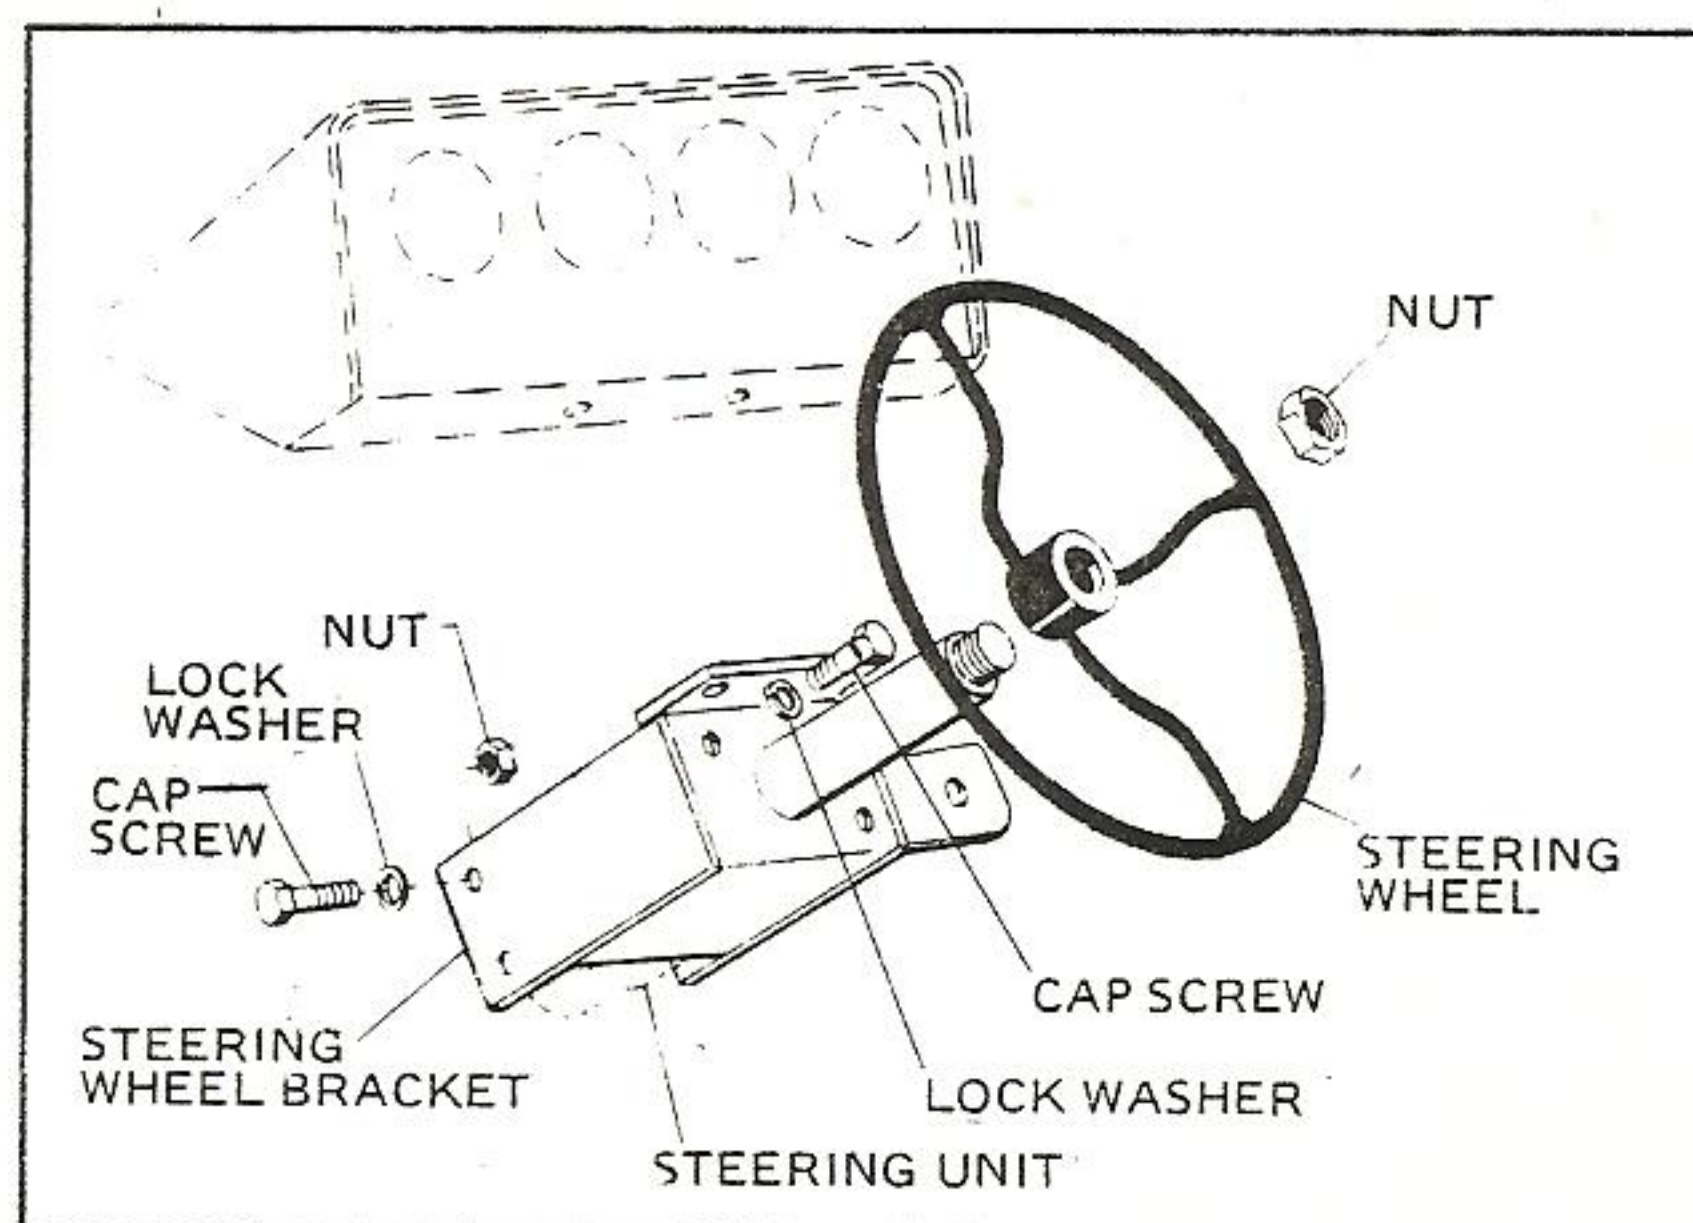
16. STEERING UNIT ASSEMBLY
